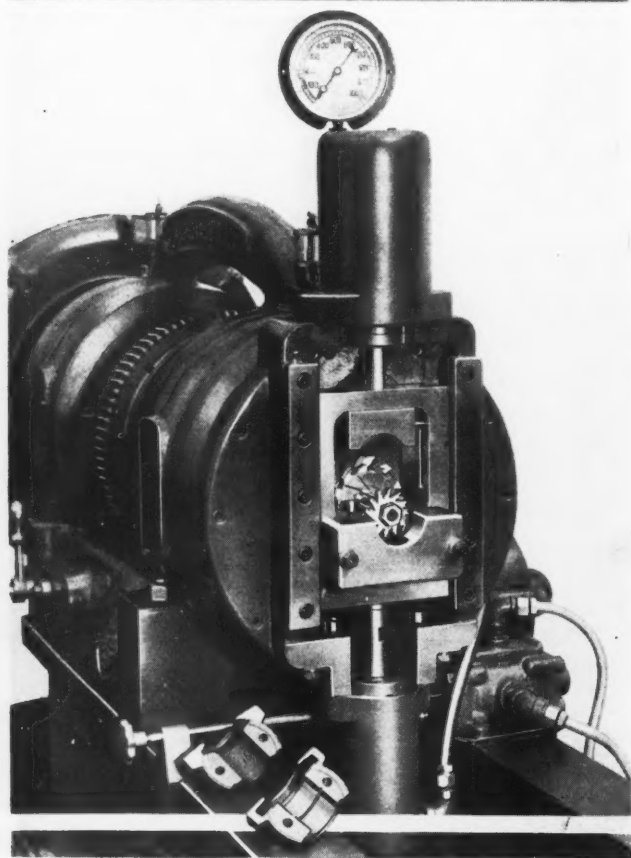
A Hall Planetary Milling Machine, Equipped with Hydraulic Chuck, Finishing the Bores and Ends of 45 Half-bearings an Hour
